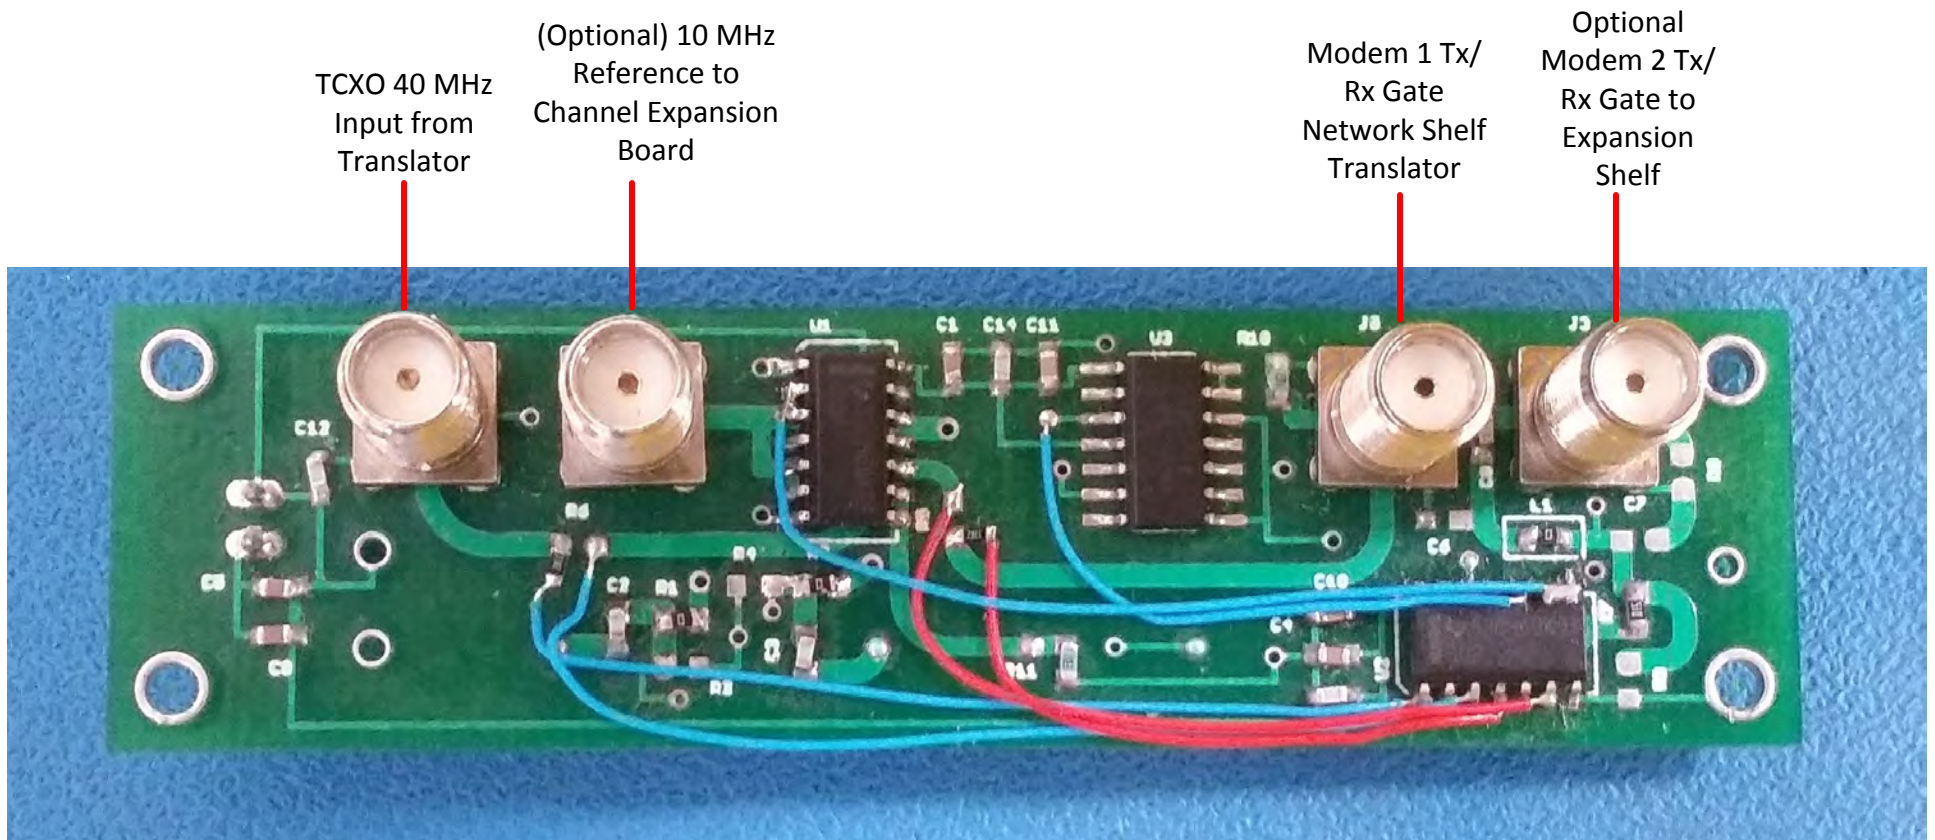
BOTTOM VIEW, PROTOCOL TRANSLATOR BOARD
